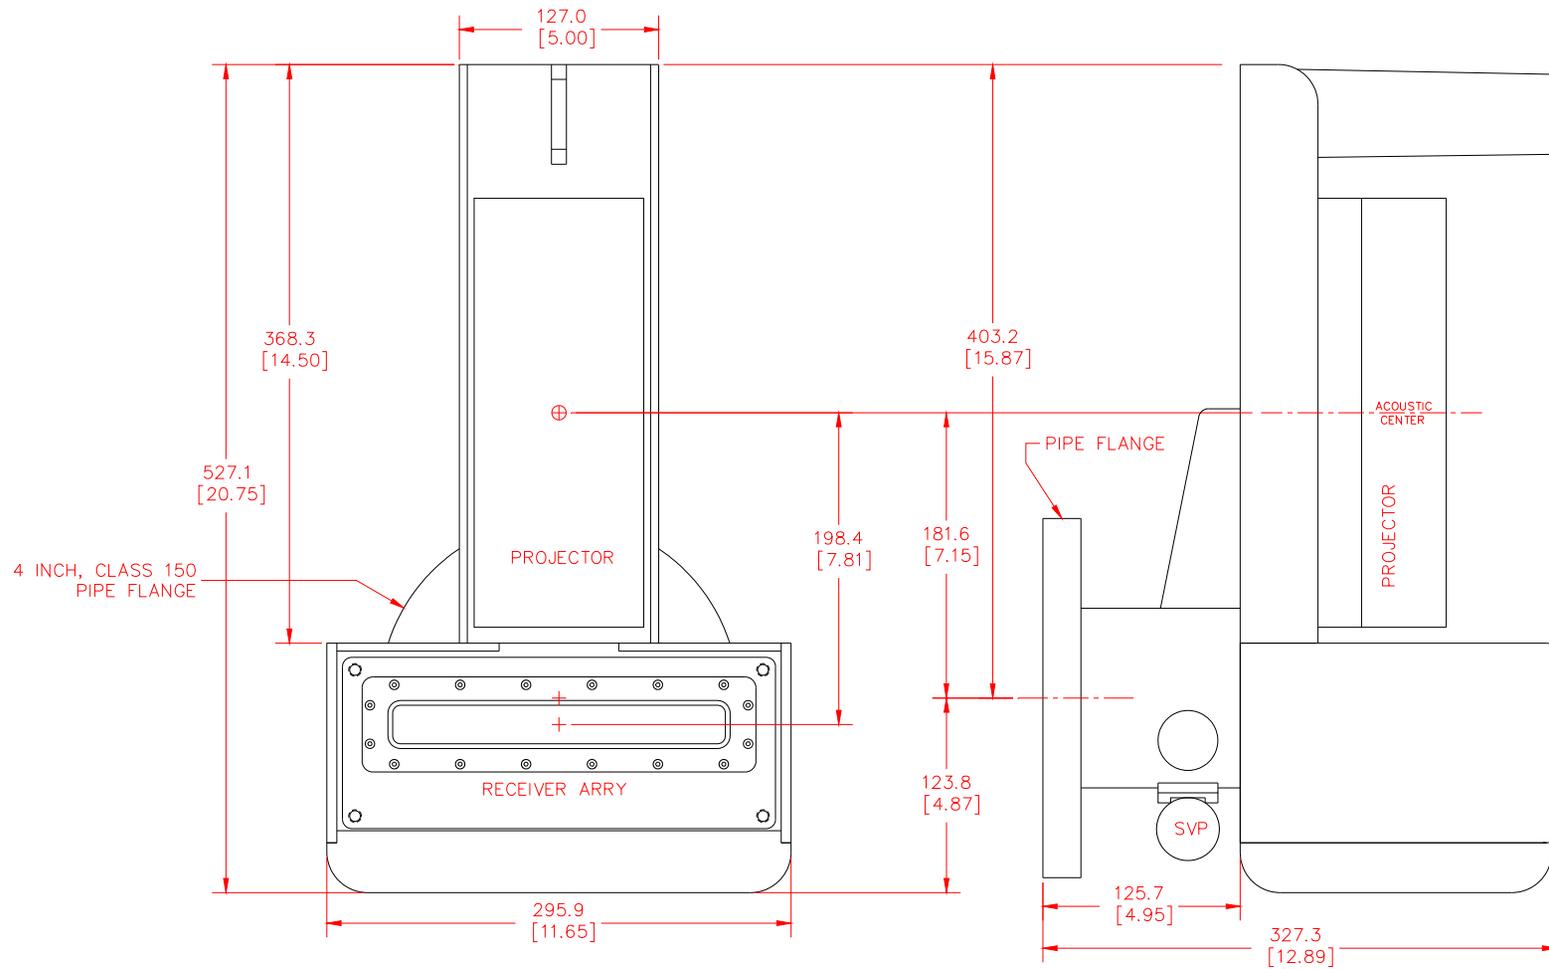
Sonic 2022 Mounting Bracket Drawing 1
